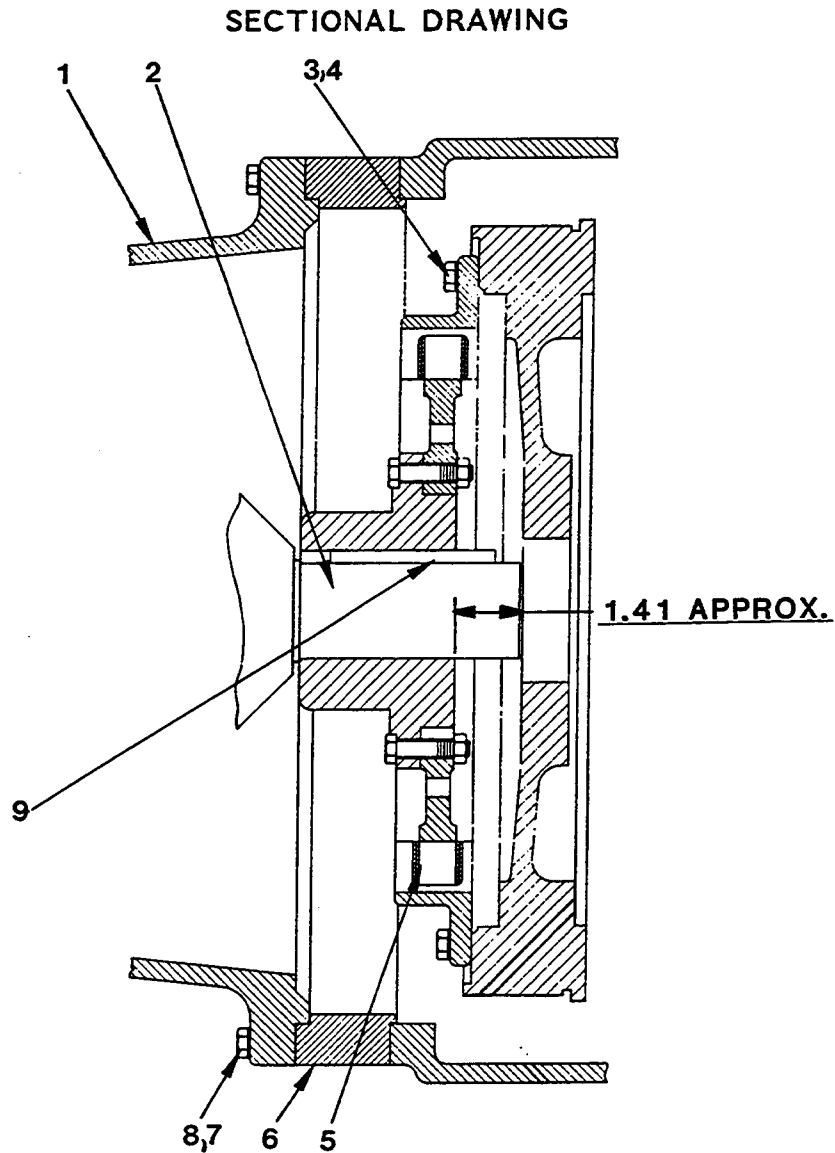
Optional Drive Assembly For Pump Model VG4D3-BF6L
